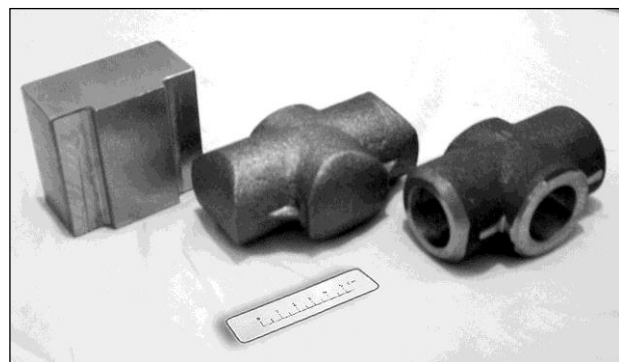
Overall View Of Preform And Final Shape (Cross Die Forging)
